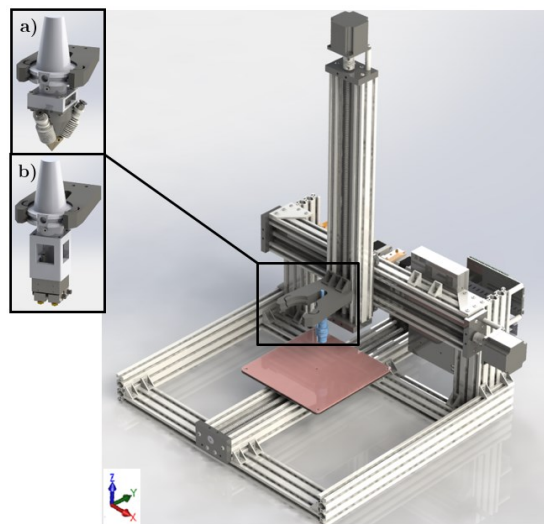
Assembly design of the system including the subsystem printing heads deposition a) single mixing extrusion, b) multi-nozzle extrusion
